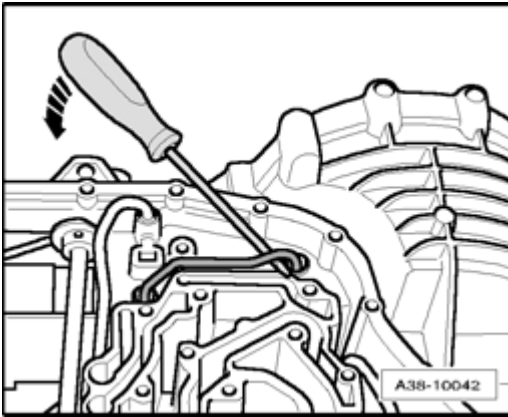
Pressing Off Oil Tube For Rear Final Drive Evenly From Transmission Housing Using Screwdriver
